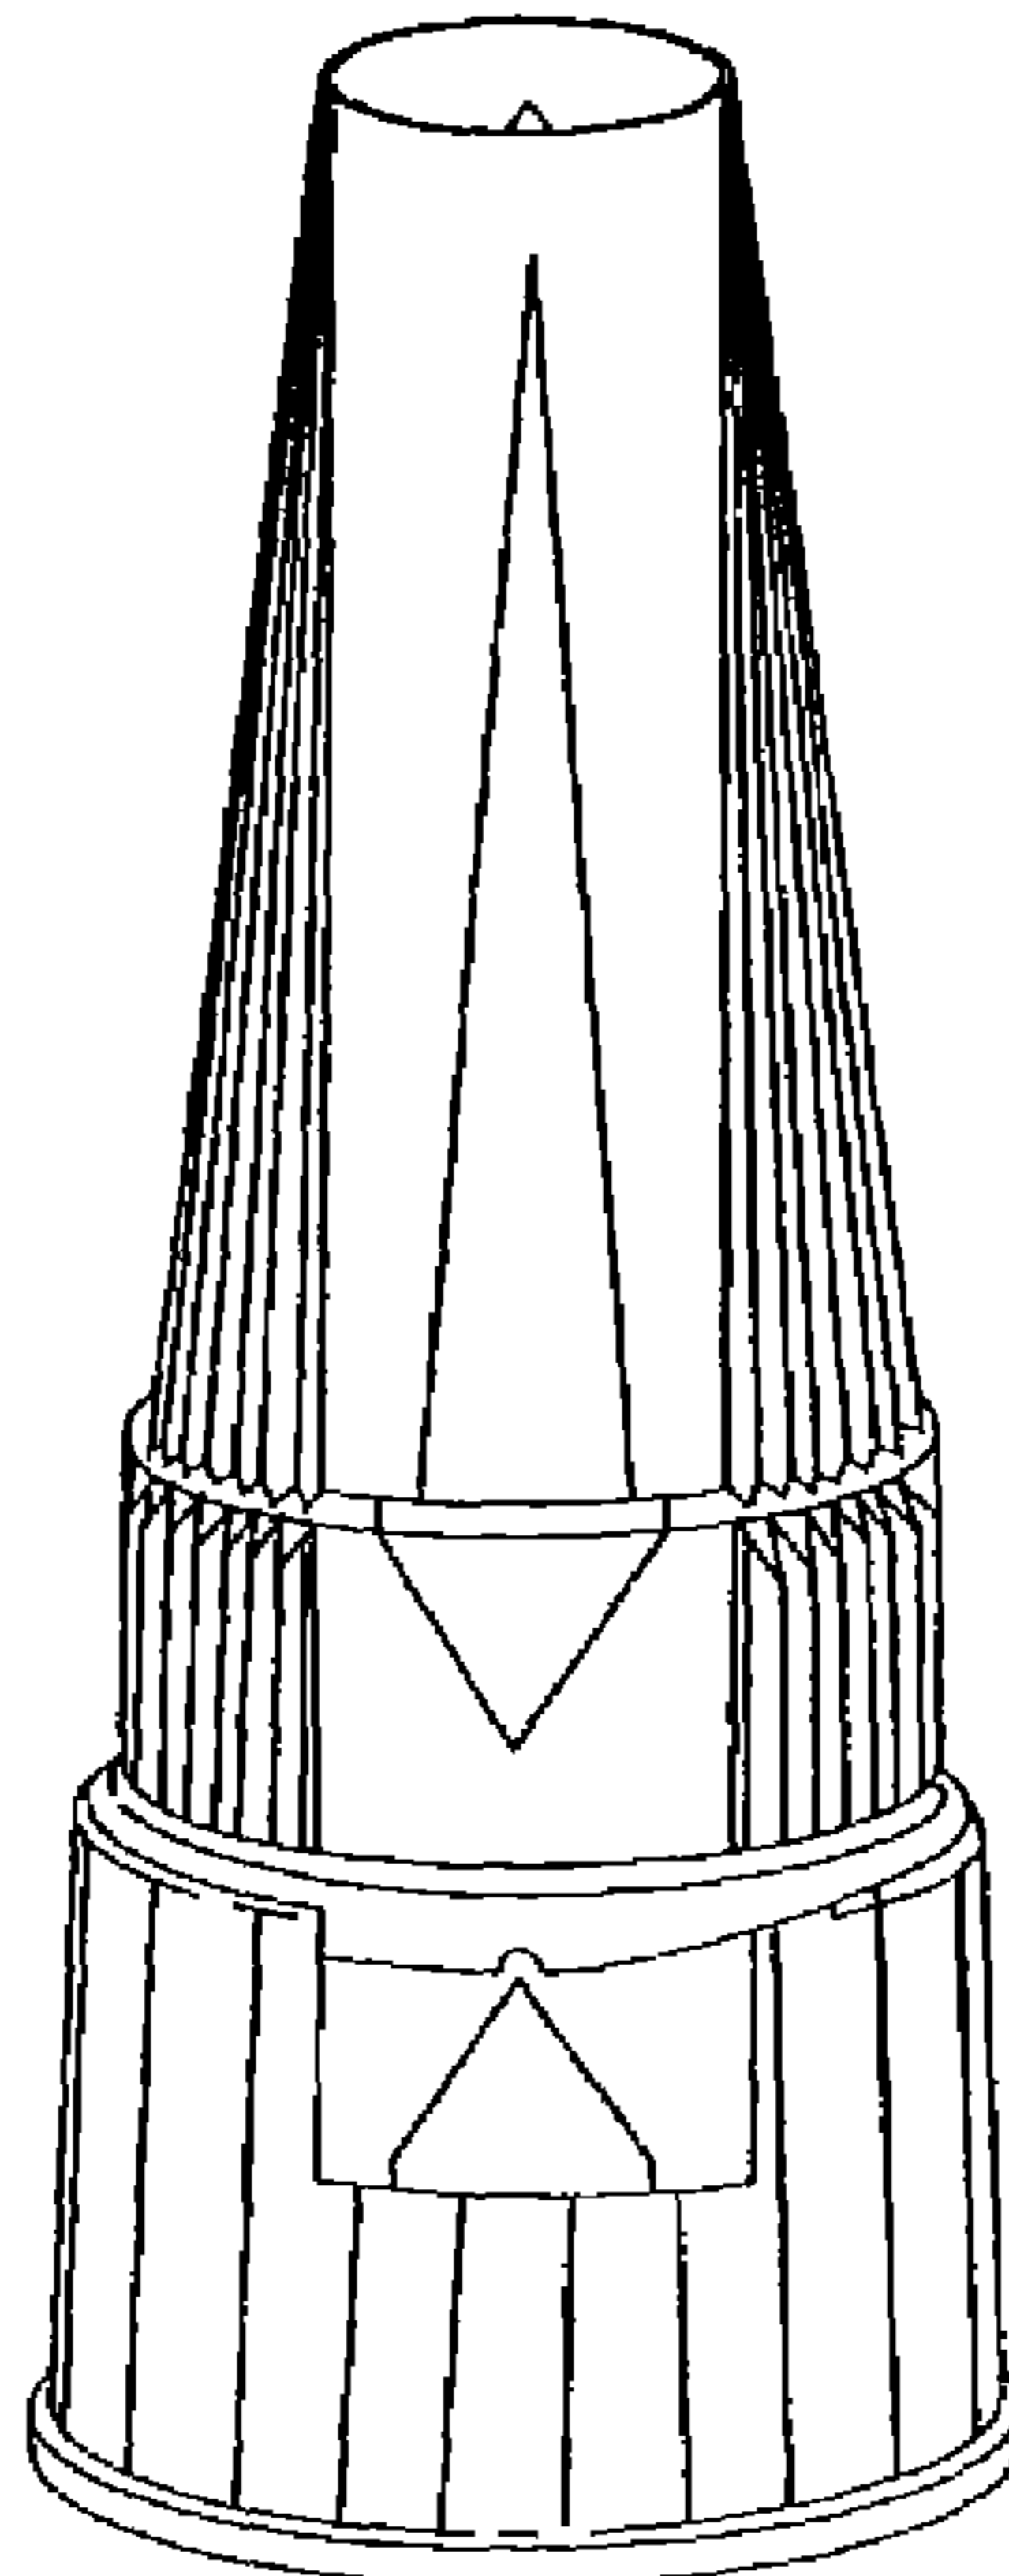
depicts a side perspective view of the design (the other side view is a mirror image thereof);
